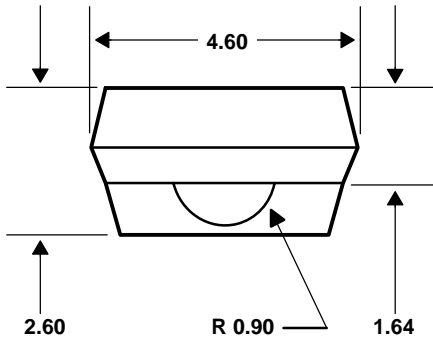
Package S — Single-In-Line Side-Looker Package Configuration
